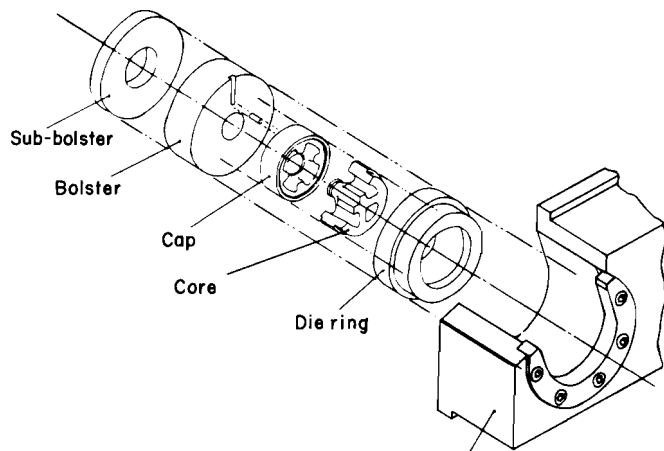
TYPICAL TOOLING ASSEMBLY FOR PORT-HOLE DIE EXTRUSION OF ALUMINUM ALLOYS⁽¹⁴⁾
